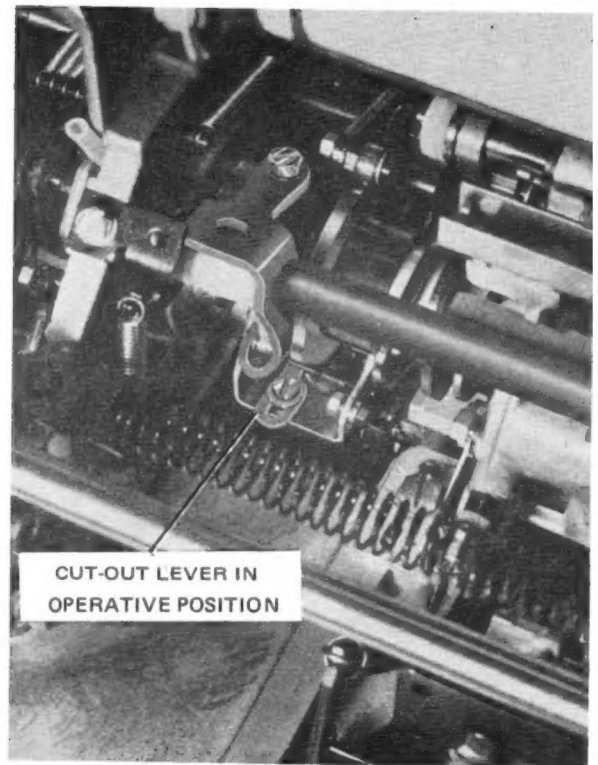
MOTOR CONTROL SWITCH CUT-OUT LEVER
